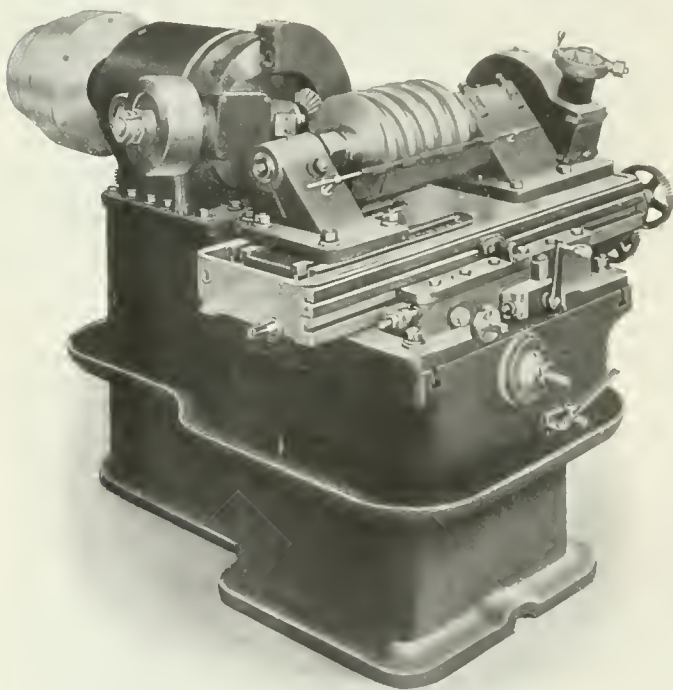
Schuchardt & Schutte Worm Milling Machine
